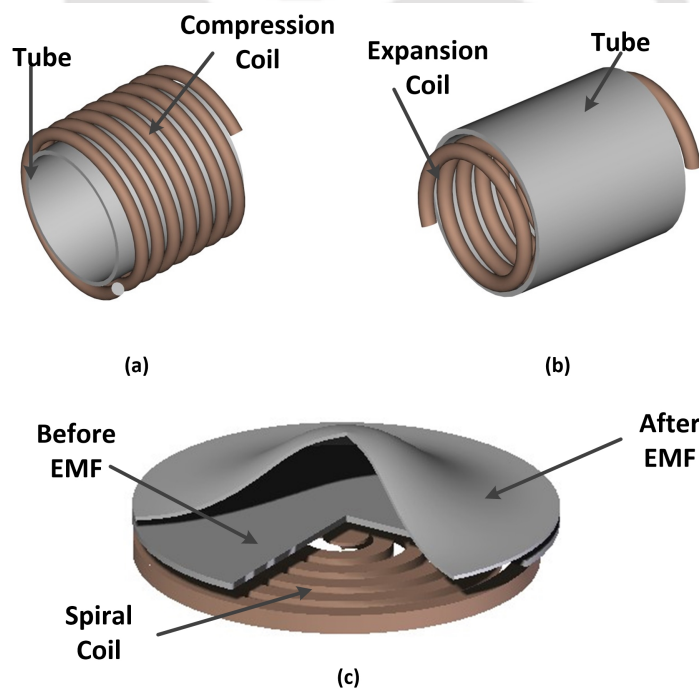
Electromagnetic forming coils (a) Helical coil for tube compression (b) Helical coil for tube expansion (c) Spiral coil for sheet forming
